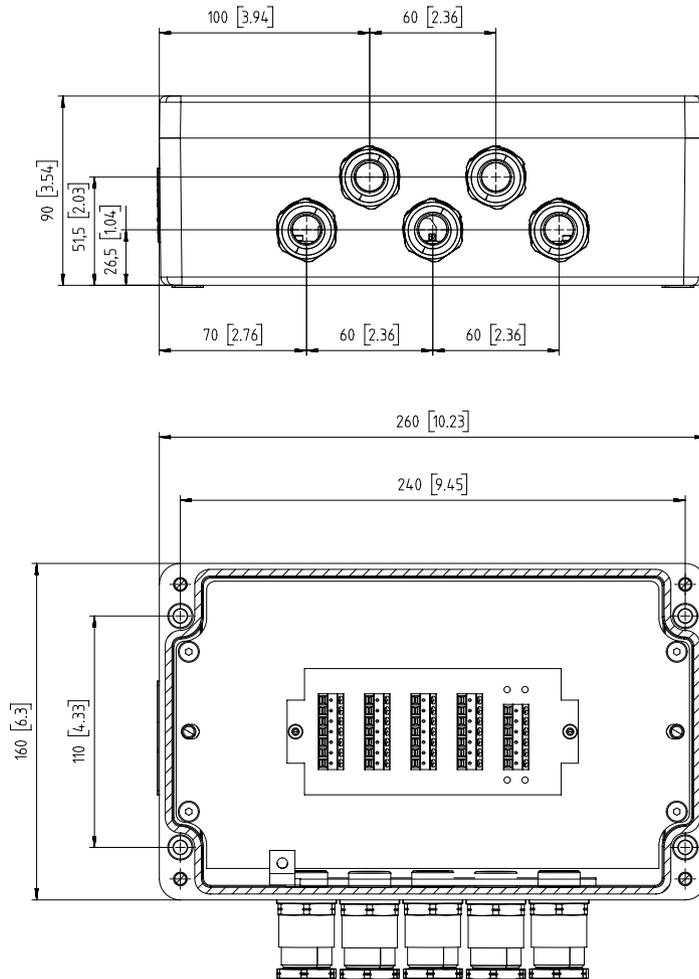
Dimension drawing for polyester enclosure, dimensions in mm [inch]
